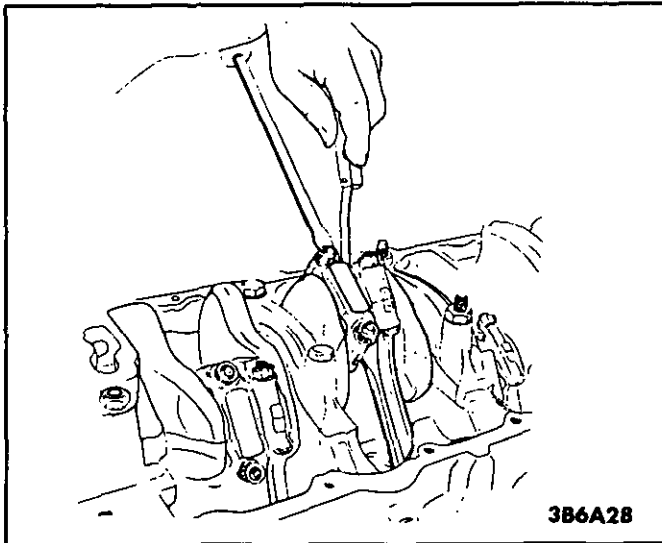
Measuring Connecting Rod Side Clearance (Double Rod Journal)
